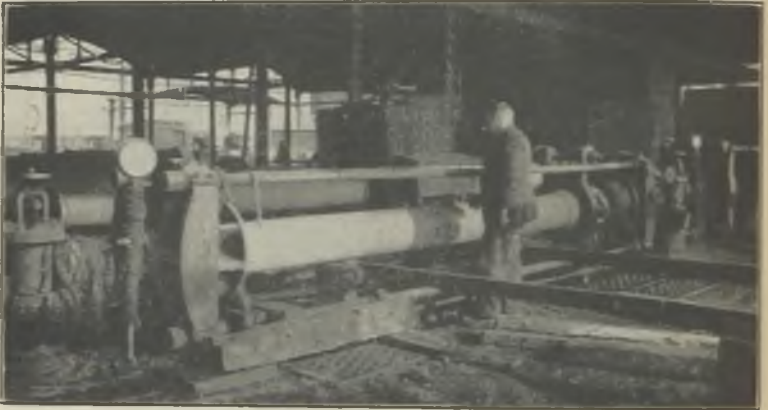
HYDRAULIC TESTING OF CAST-IRON PIPE.
